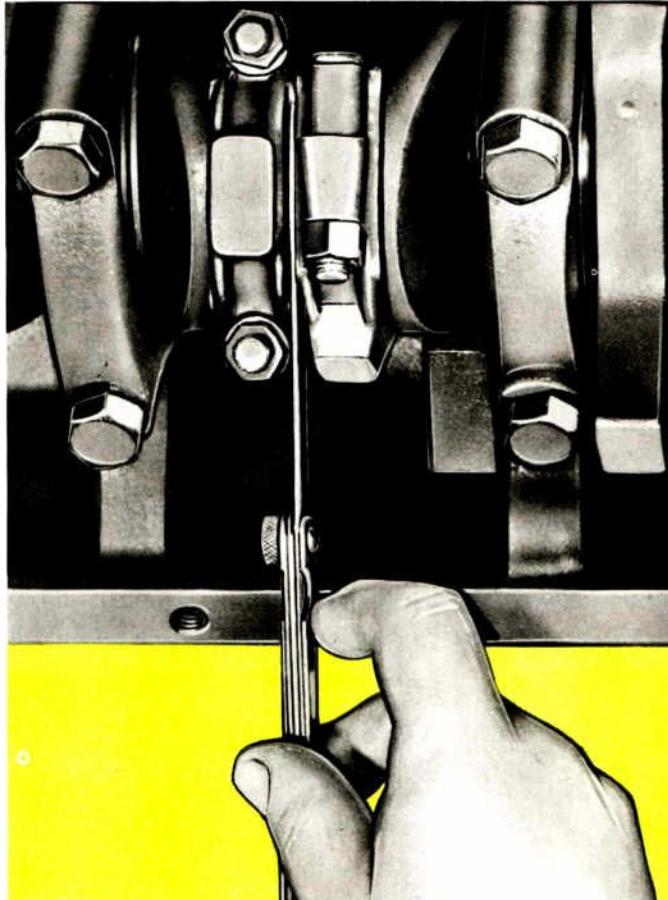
CHECKING ROD SIDE CLEARANCE
